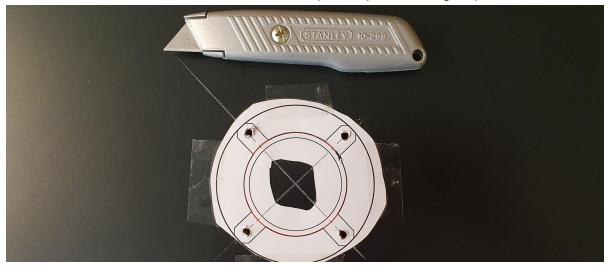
A sharp knife is being used to cut the big red circle between the drilled holes.
